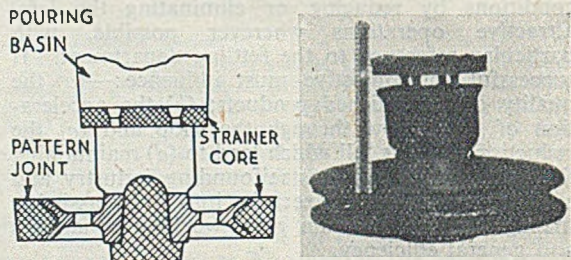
Layout Drawing and Actual Casting made by the use of Pencil-type Gates.
